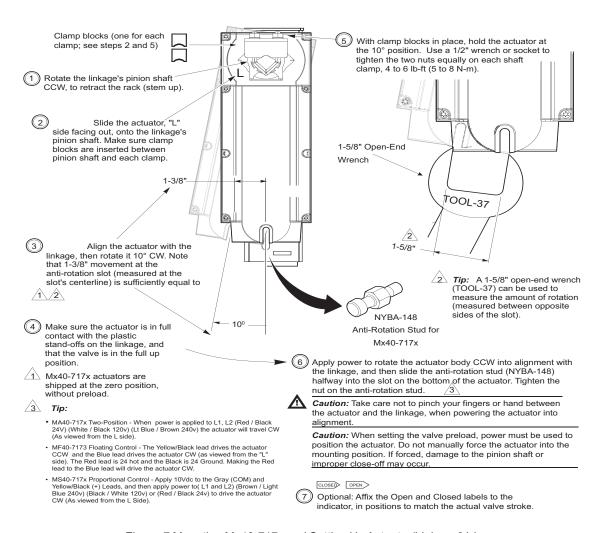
Mounting Mx40-717x and Setting Up Actuator/Linkage/Valve
